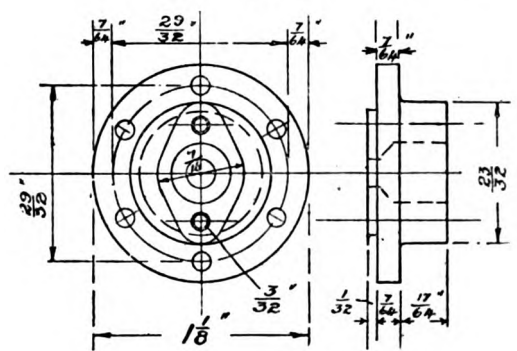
HIGH-PRESSURE BACK CYLINDER COVER.
